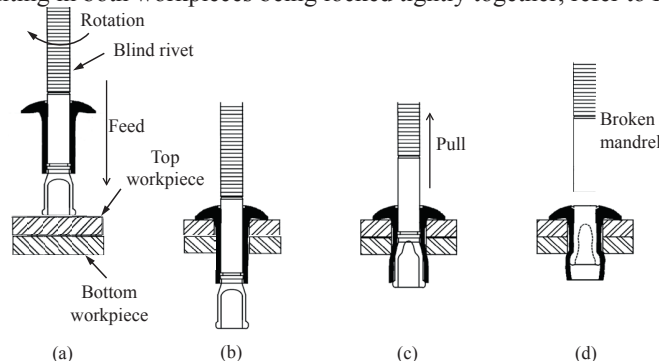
Illustration of the friction stir blind riveting process. (a) The rotating blind rivet approaches the workpieces, (b) the blind rivet reaches its destination, (c) the mandrel is pulled by a rivet gun and (d) the mandrel breaks at its notch and a finished joint is fabricated.
